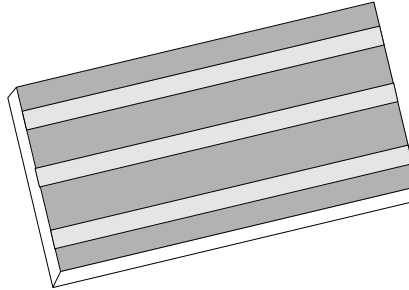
The figure shows workpiece 2 before workpiece 1 is positioned. Primer is removed for 3 weld joints.
